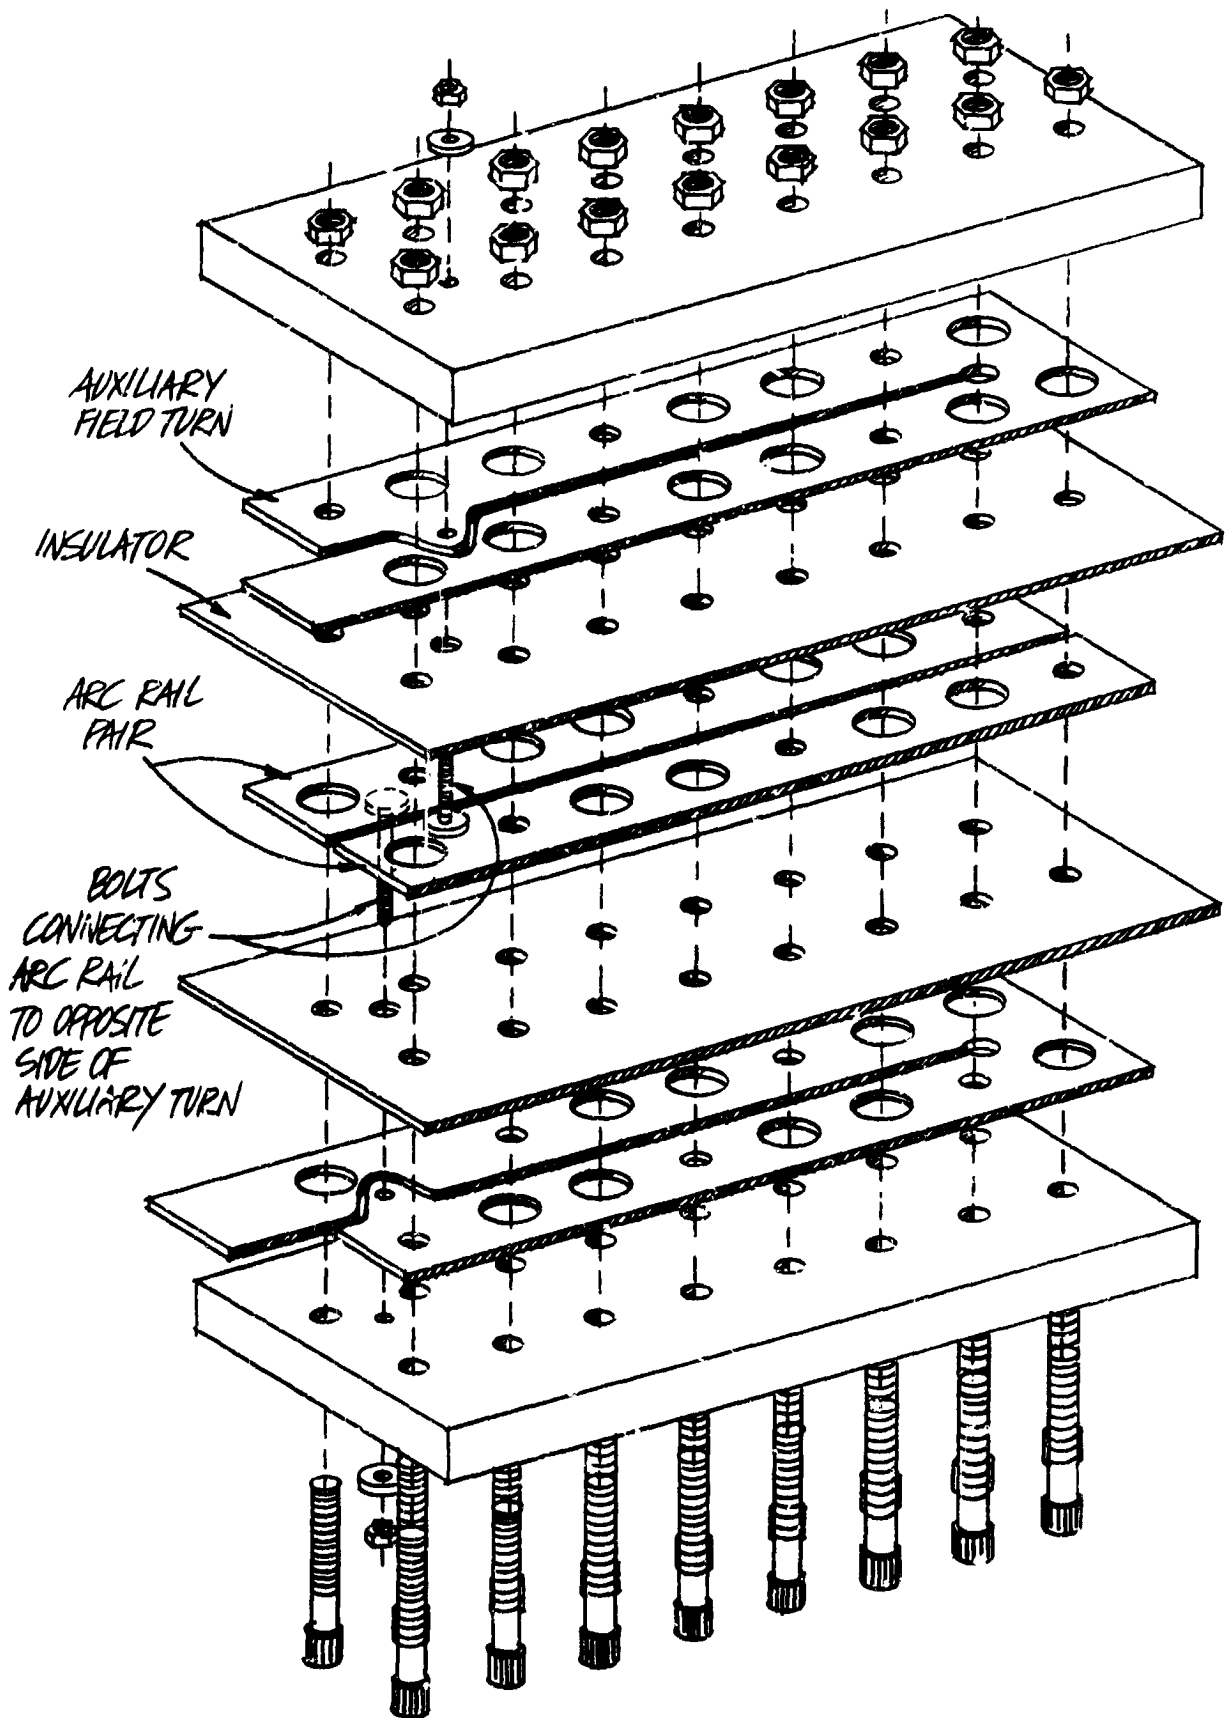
Exploded View of Series Type Auxiliary Field Gun
